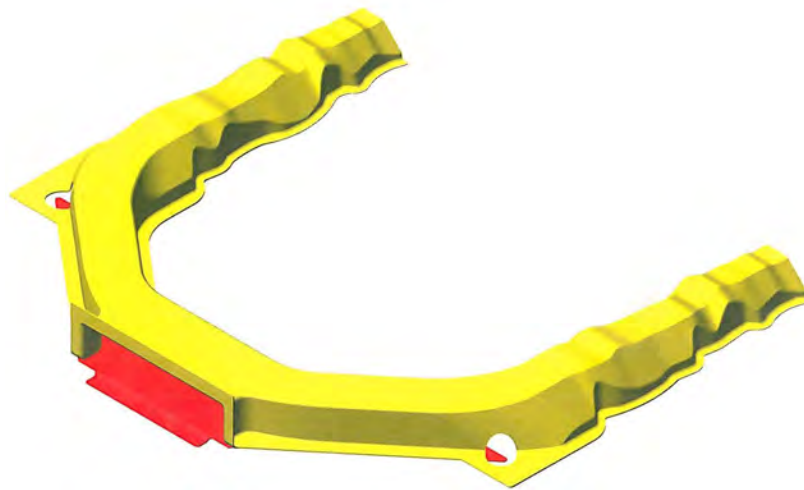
50.1 3112-3 Rail Assembly Upper
